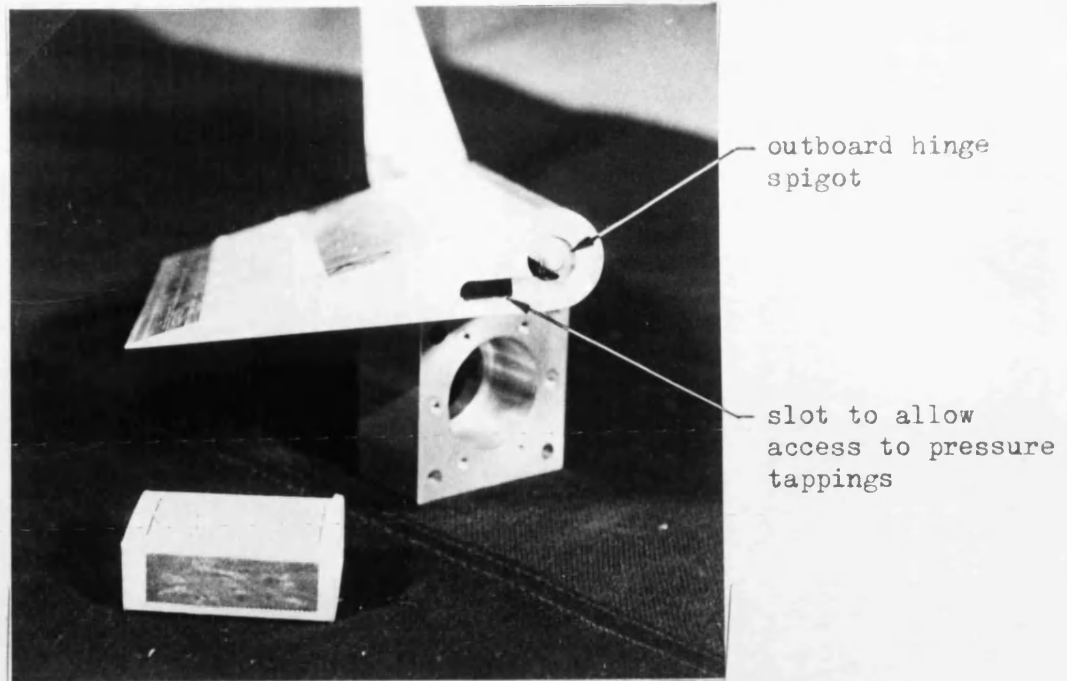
Outboard end of control surface - cover plate fitted - showing spigot forming outboard hinge.
